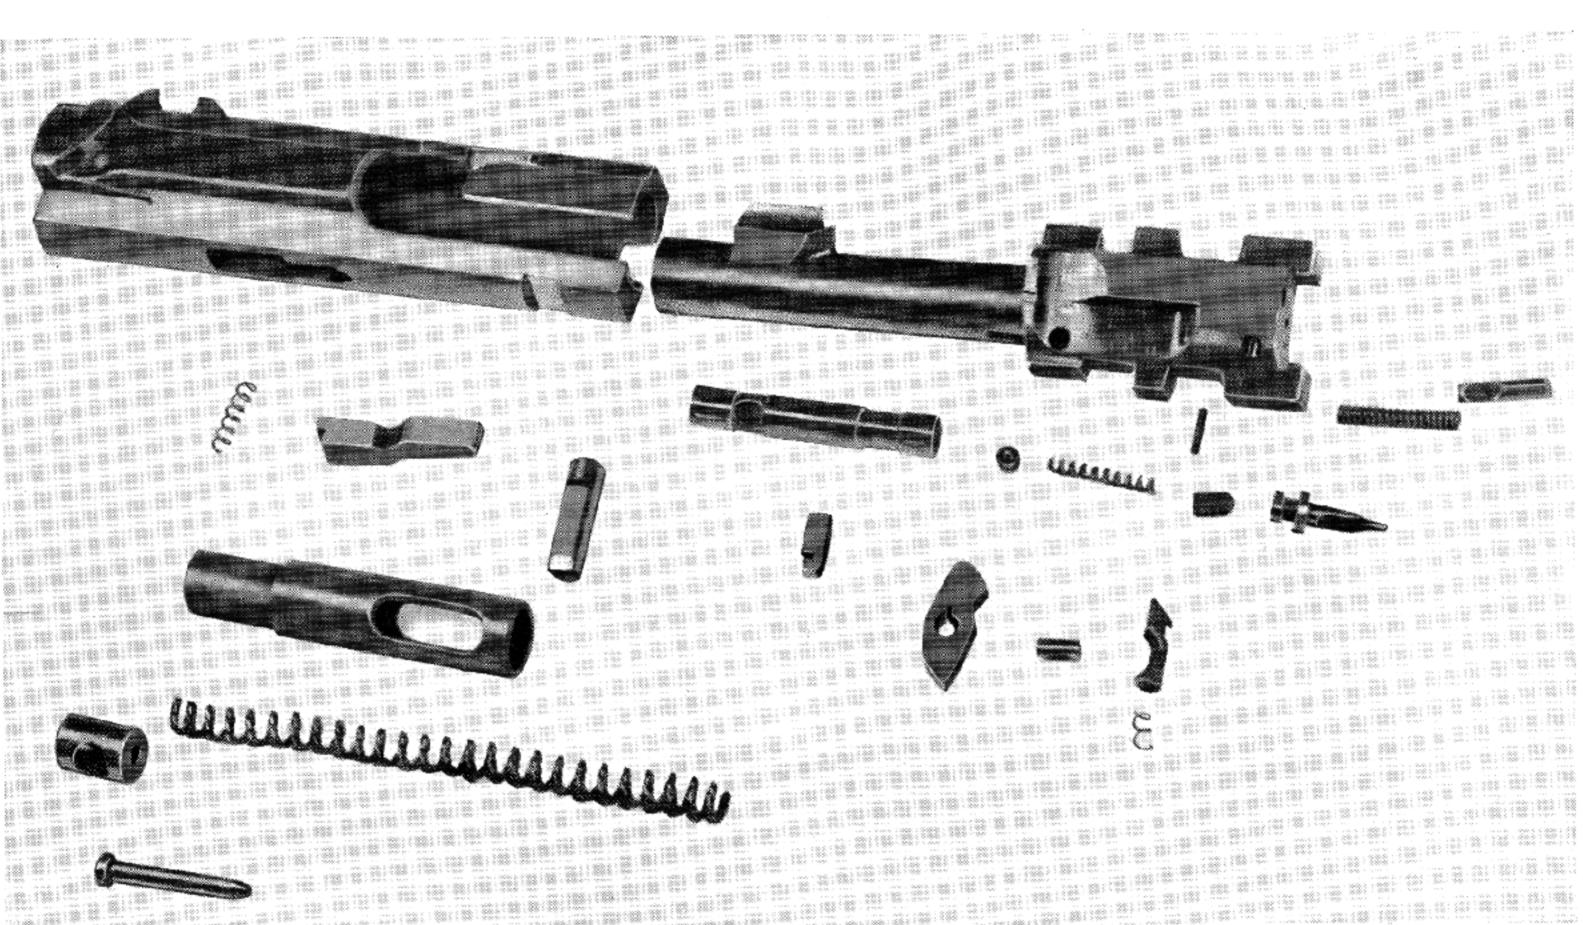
Synchronized version of 23-mm NS Gun. View of detail stripped bolt.
